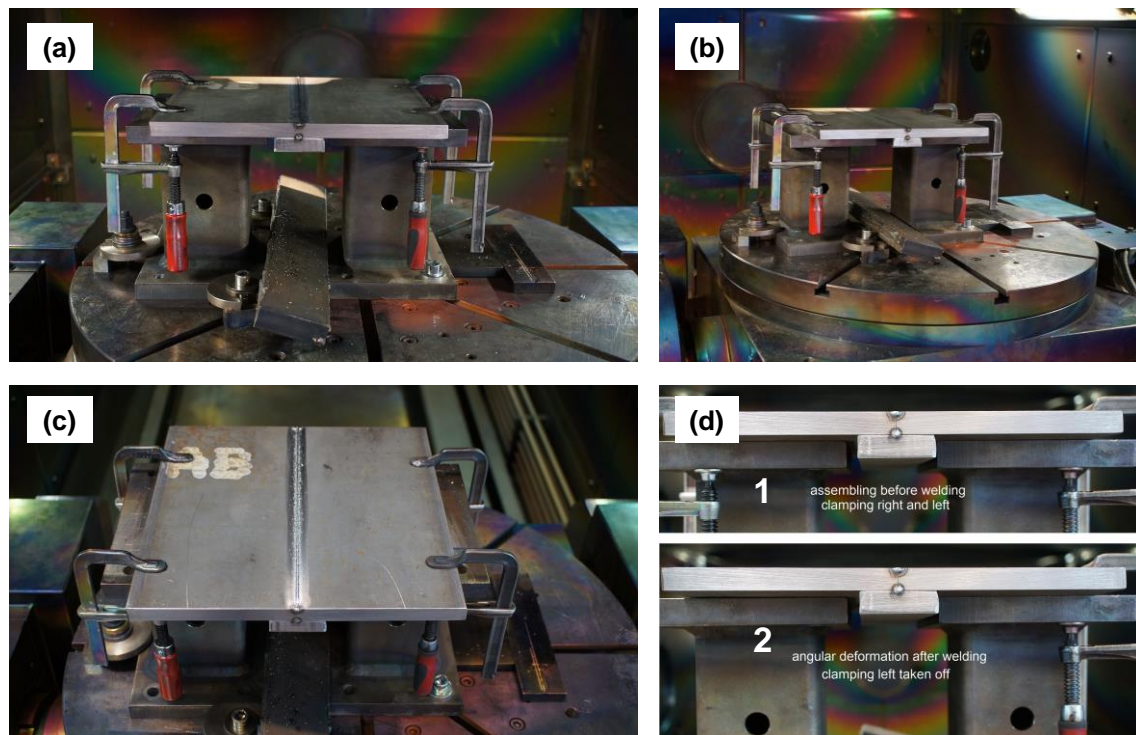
EB welding setup (a) assembly-front (b) assembly-front left (c) after welding (d) after welding, angular deformation
